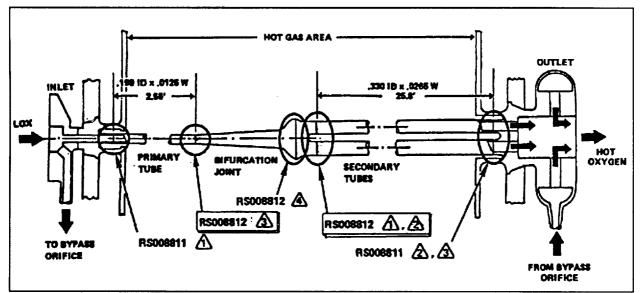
Space Shuttle Main Engine Heat Exchanger Tube Assembly
